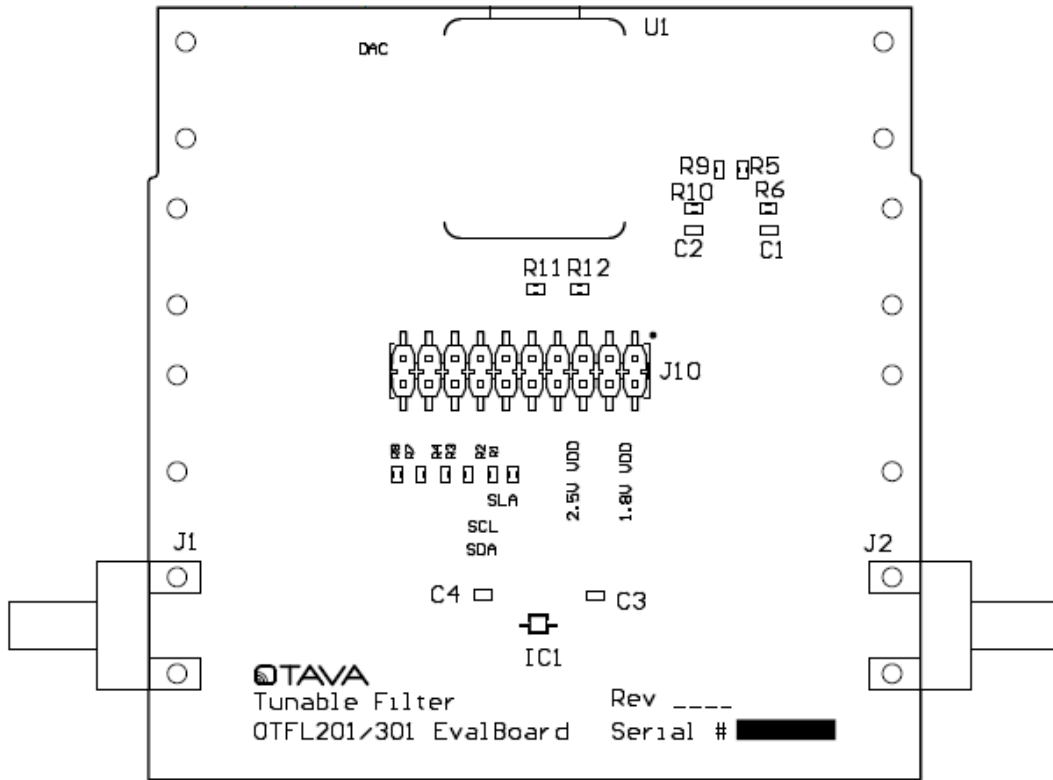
OTFL201/301-EVAL Assembly Drawing (Top)
